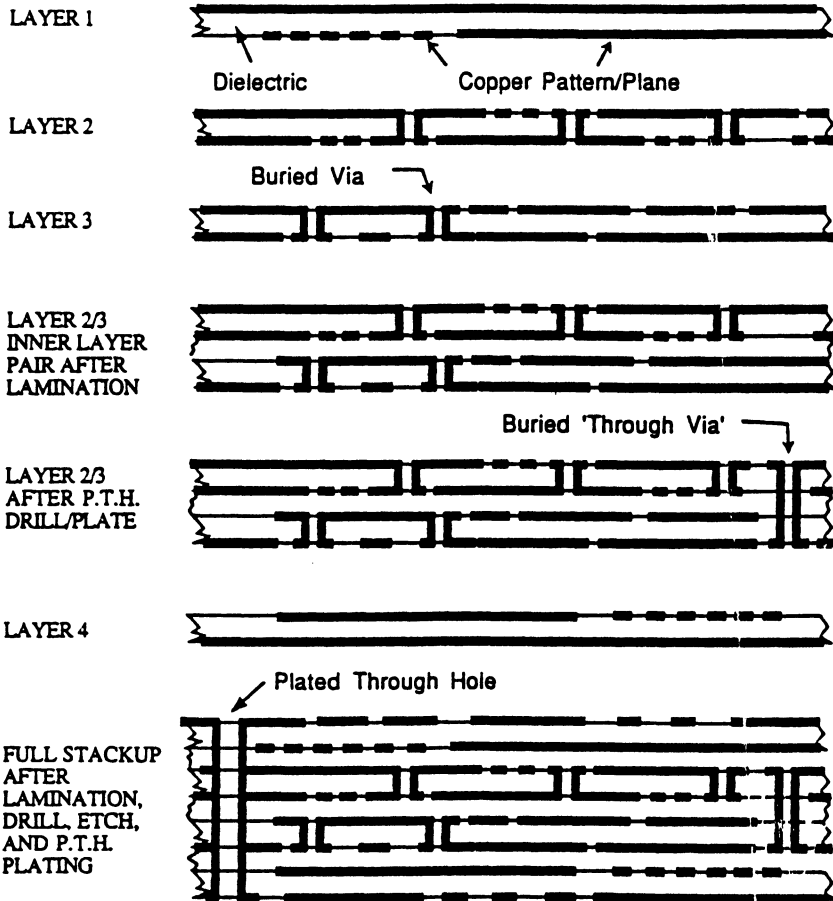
Cross section of an MCM-L printed wiring board. The schematic drawing shows construction of a typical MCM-L substrate, exhibiting blind and buried vias and a typical lamination sequence.
